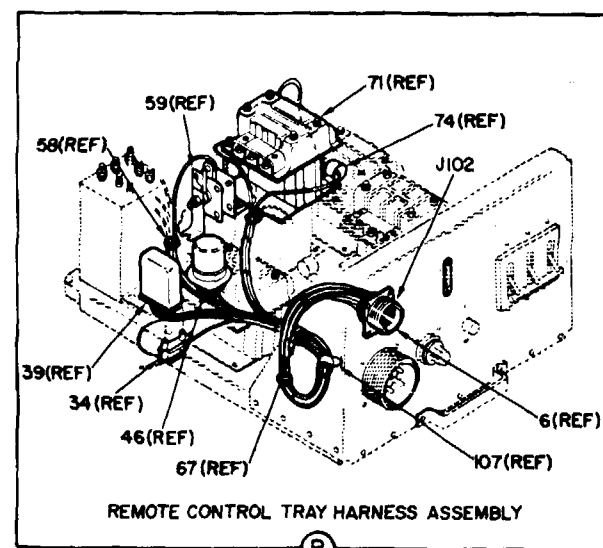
(1). Electrical tray assembly and associated wiring harness exploded view
